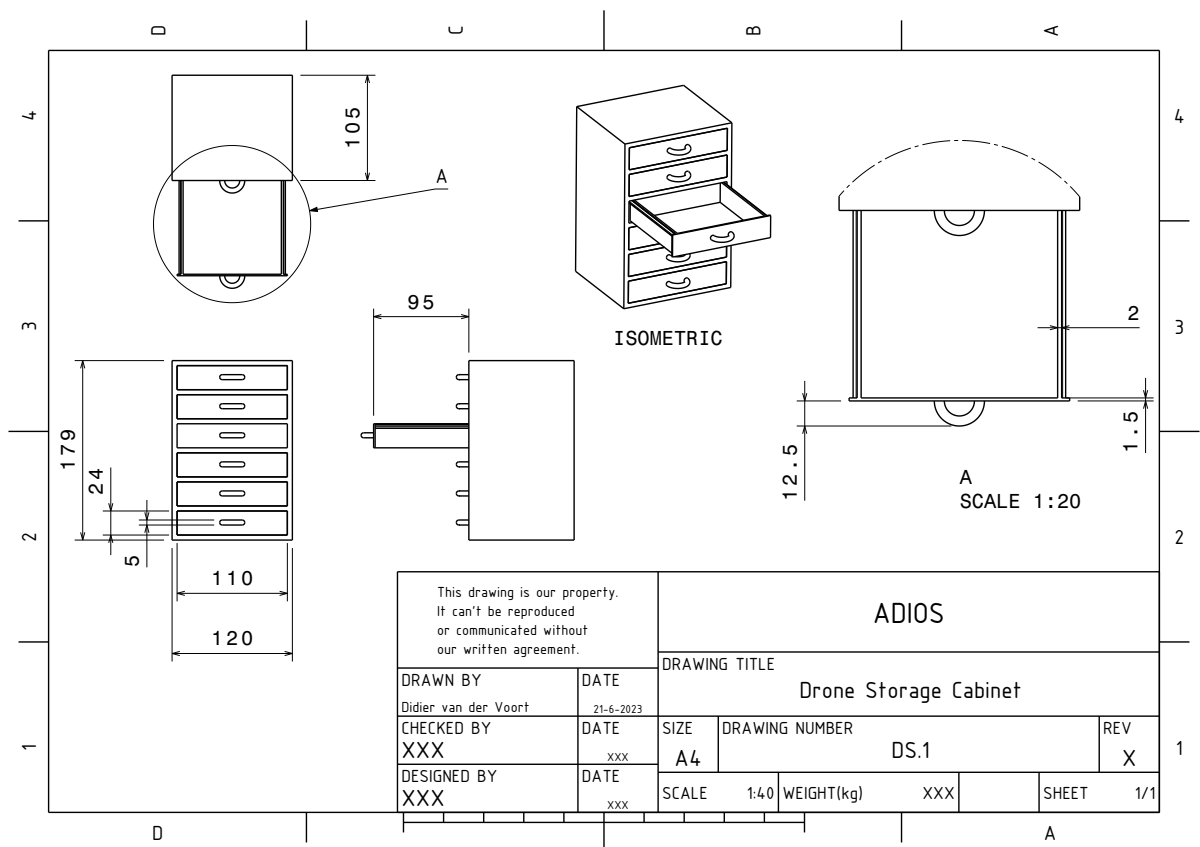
Technical drawing of the drone storage cabinet made in 3DExperience with dimensions in centimeters
